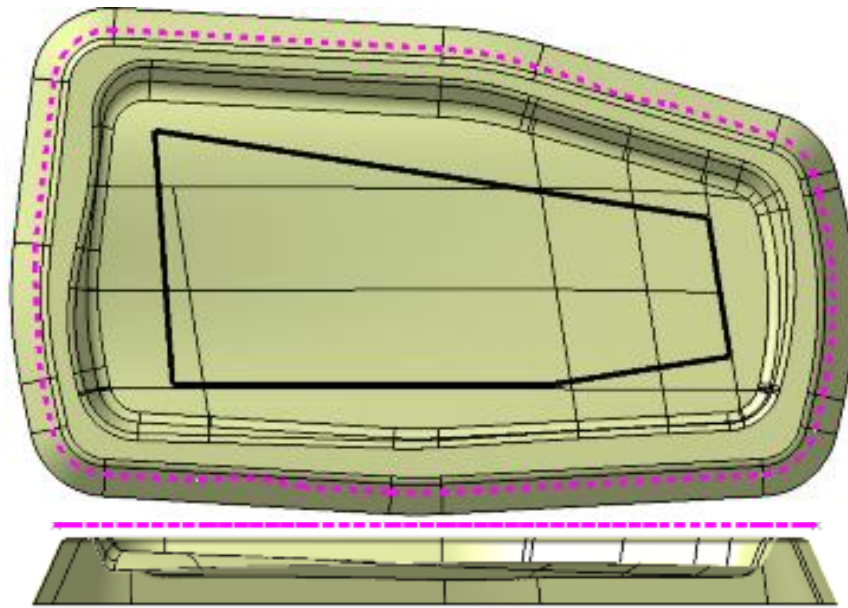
Concept-5 Tool C and Blank C – Top and Side Views
